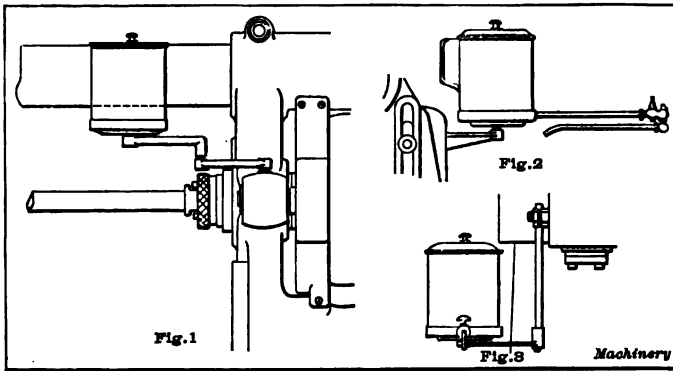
Drip-can mounted on Pivoted Bracket. Fig. 2. Drip-can with Jointed Delivery Pipe. Fig. 3. Drip-can arranged for Vertical Adjustment
